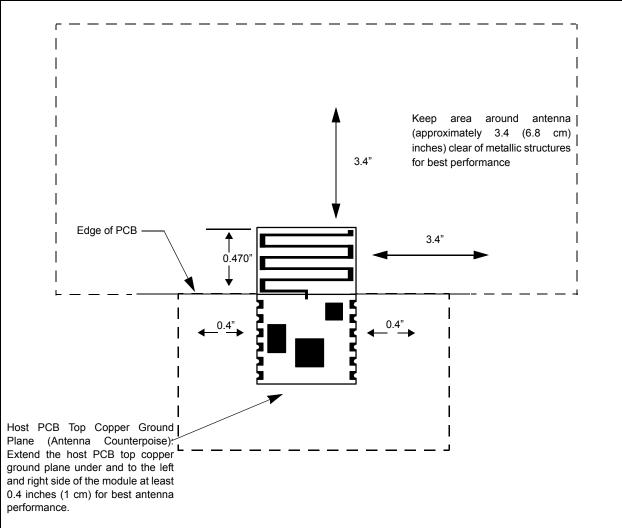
RECOMMENDED PCB FOOTPRINT
